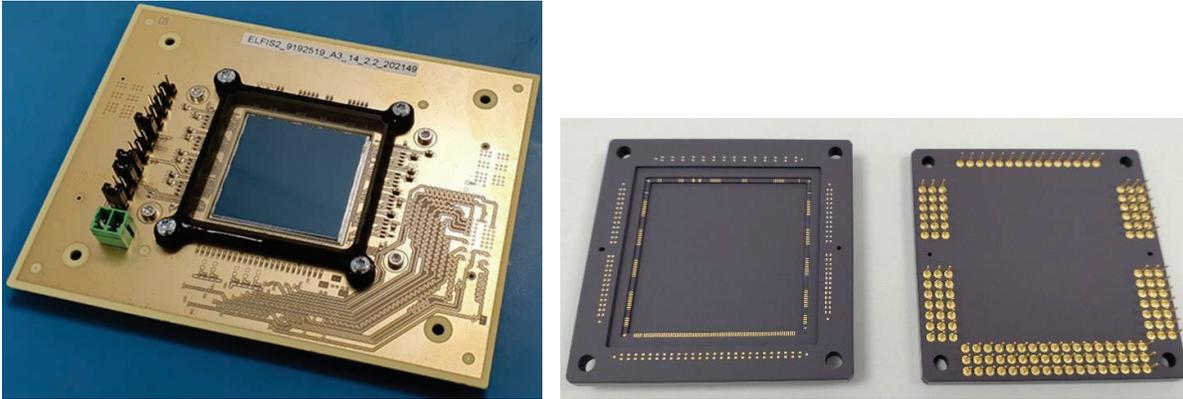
Left: Present CoB assembly of the first ELFIS2 devices - Right: package for the future flight devices
